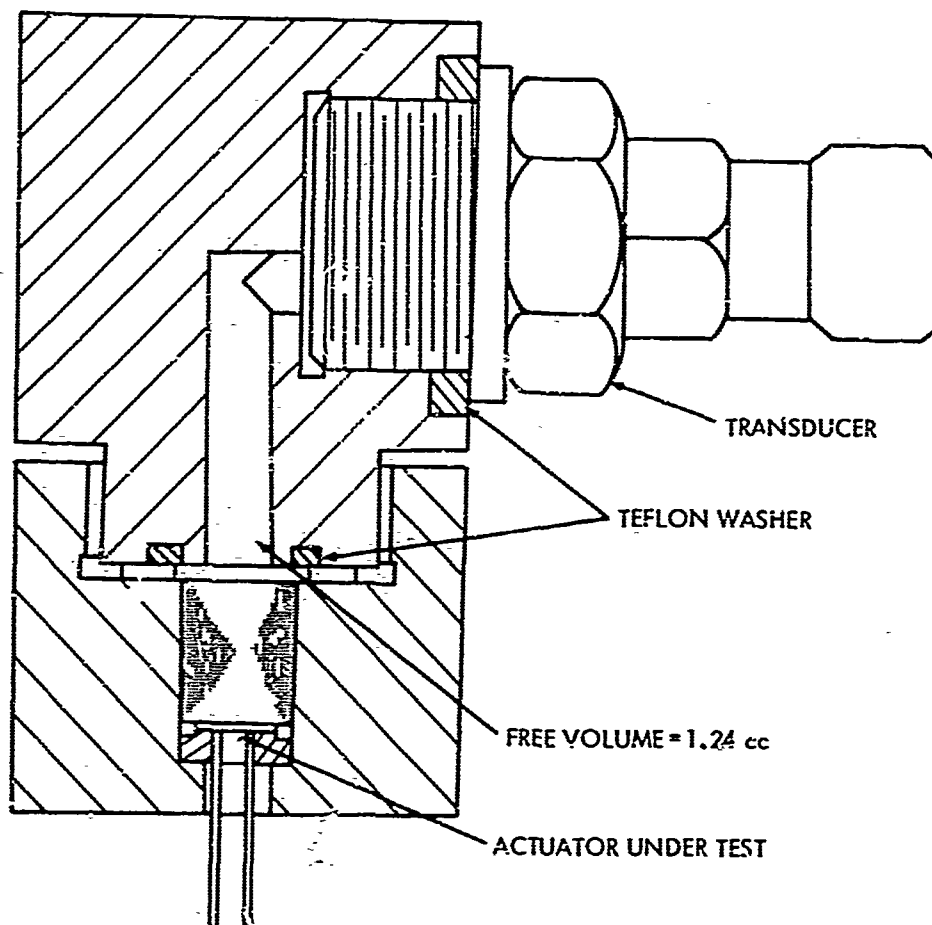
ASSEMBLY FOR PRESSURE BOMB TESTING
